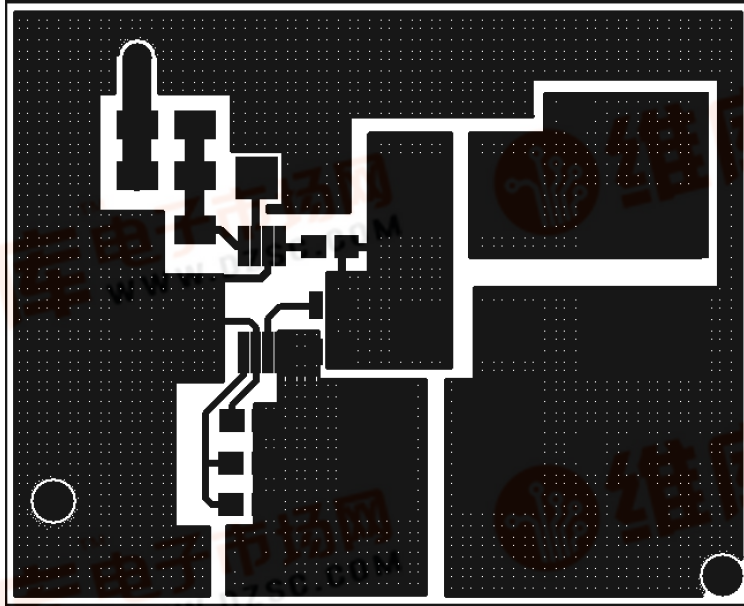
LM3489 Demonstration Board PCB Top Overlay
